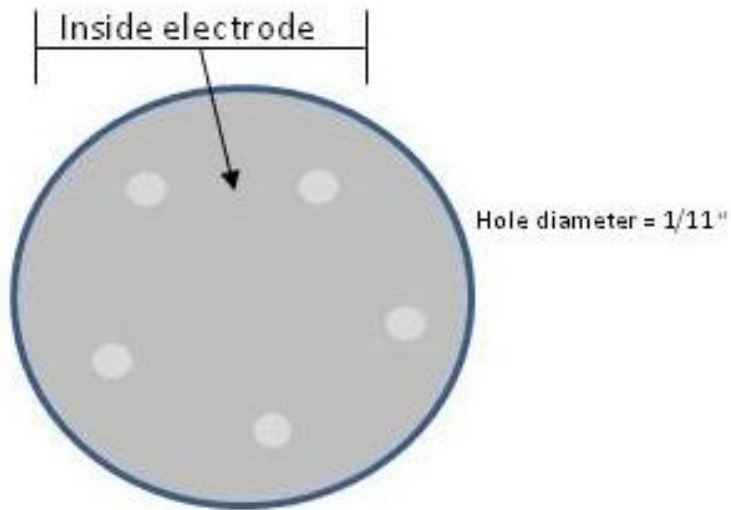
indicates the design pattern and diameter of the holes drilled in each plate to allow screws to hold the full electrode housing together.
